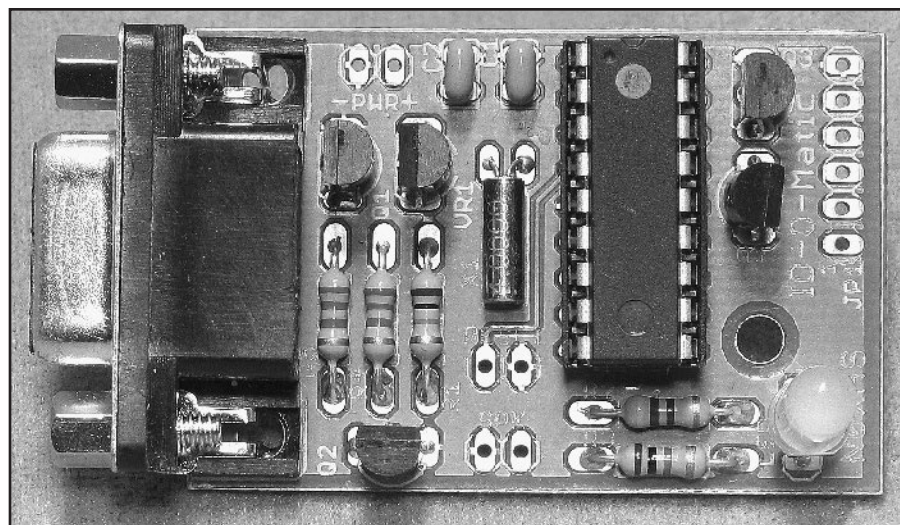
This version of the ID-O-Matic is built from a kit offered by www.hamgadgets.com. The parts count is low, and it can easily be built on a prototype board.
